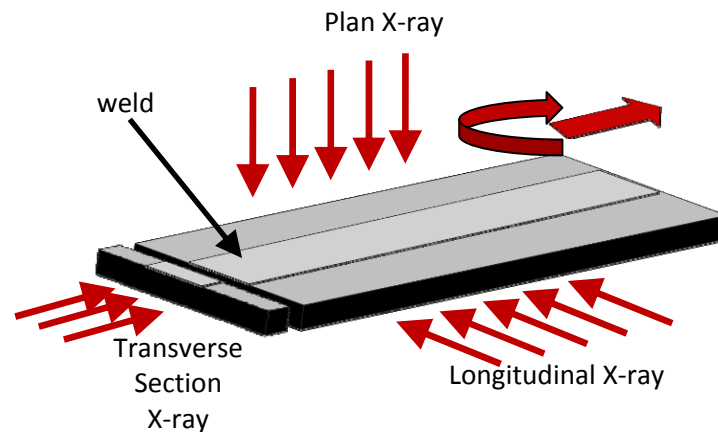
Layout directions of x-ray radiographs were taken of the weld region.
